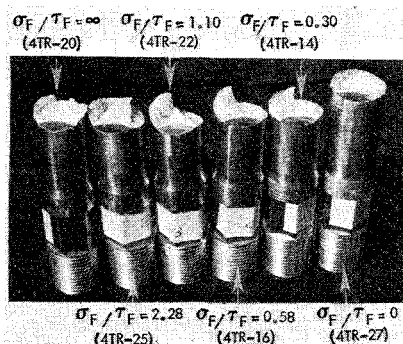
Fracture surfaces of statically tested titanium specimens.
